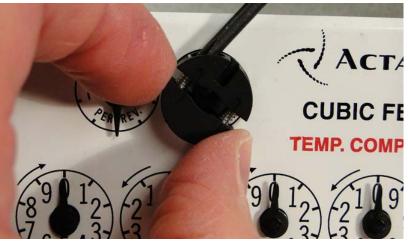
8. Thread Screws Into threaded Wheel Half
